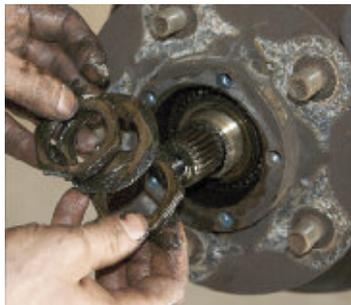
The removed lock nut, lock washer and hub adjusting nut.
